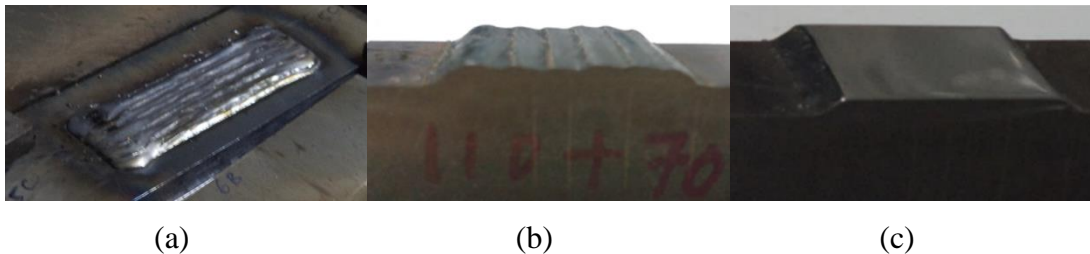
(a) Deposited multi weld beads on MS plate (b) EDM cut weld sample after deposition (c) polished sample for micro-hardness testing.
